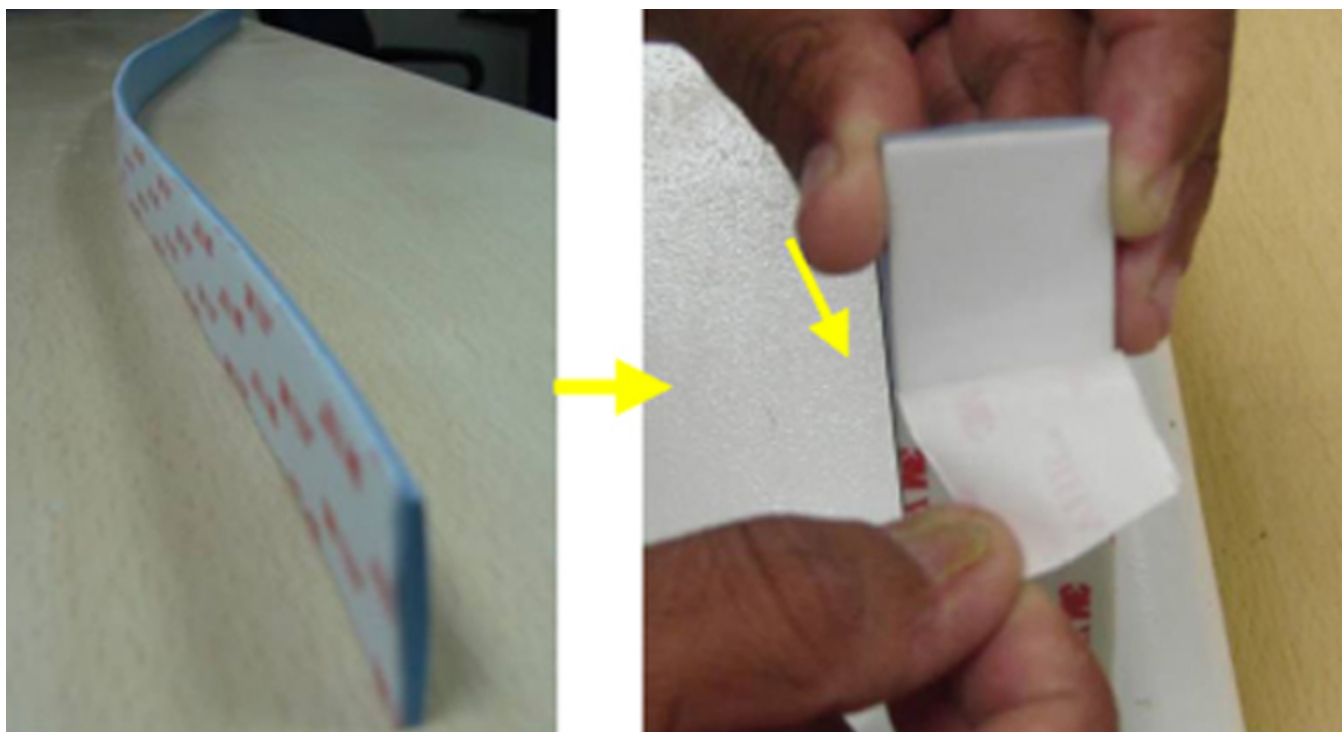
New Arm Board Bumper with Glued 3M Double-Sided VHB
